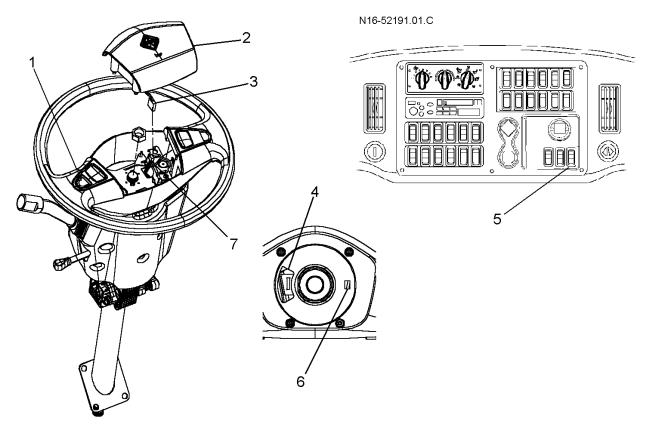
Air Horn Wiring In Steering Wheel And Instrument panel
